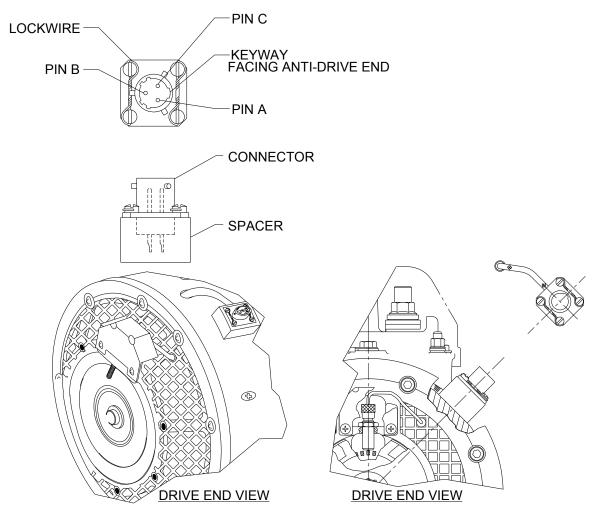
Attaching 3-Pin Connector to Stator and Housing Assembly
